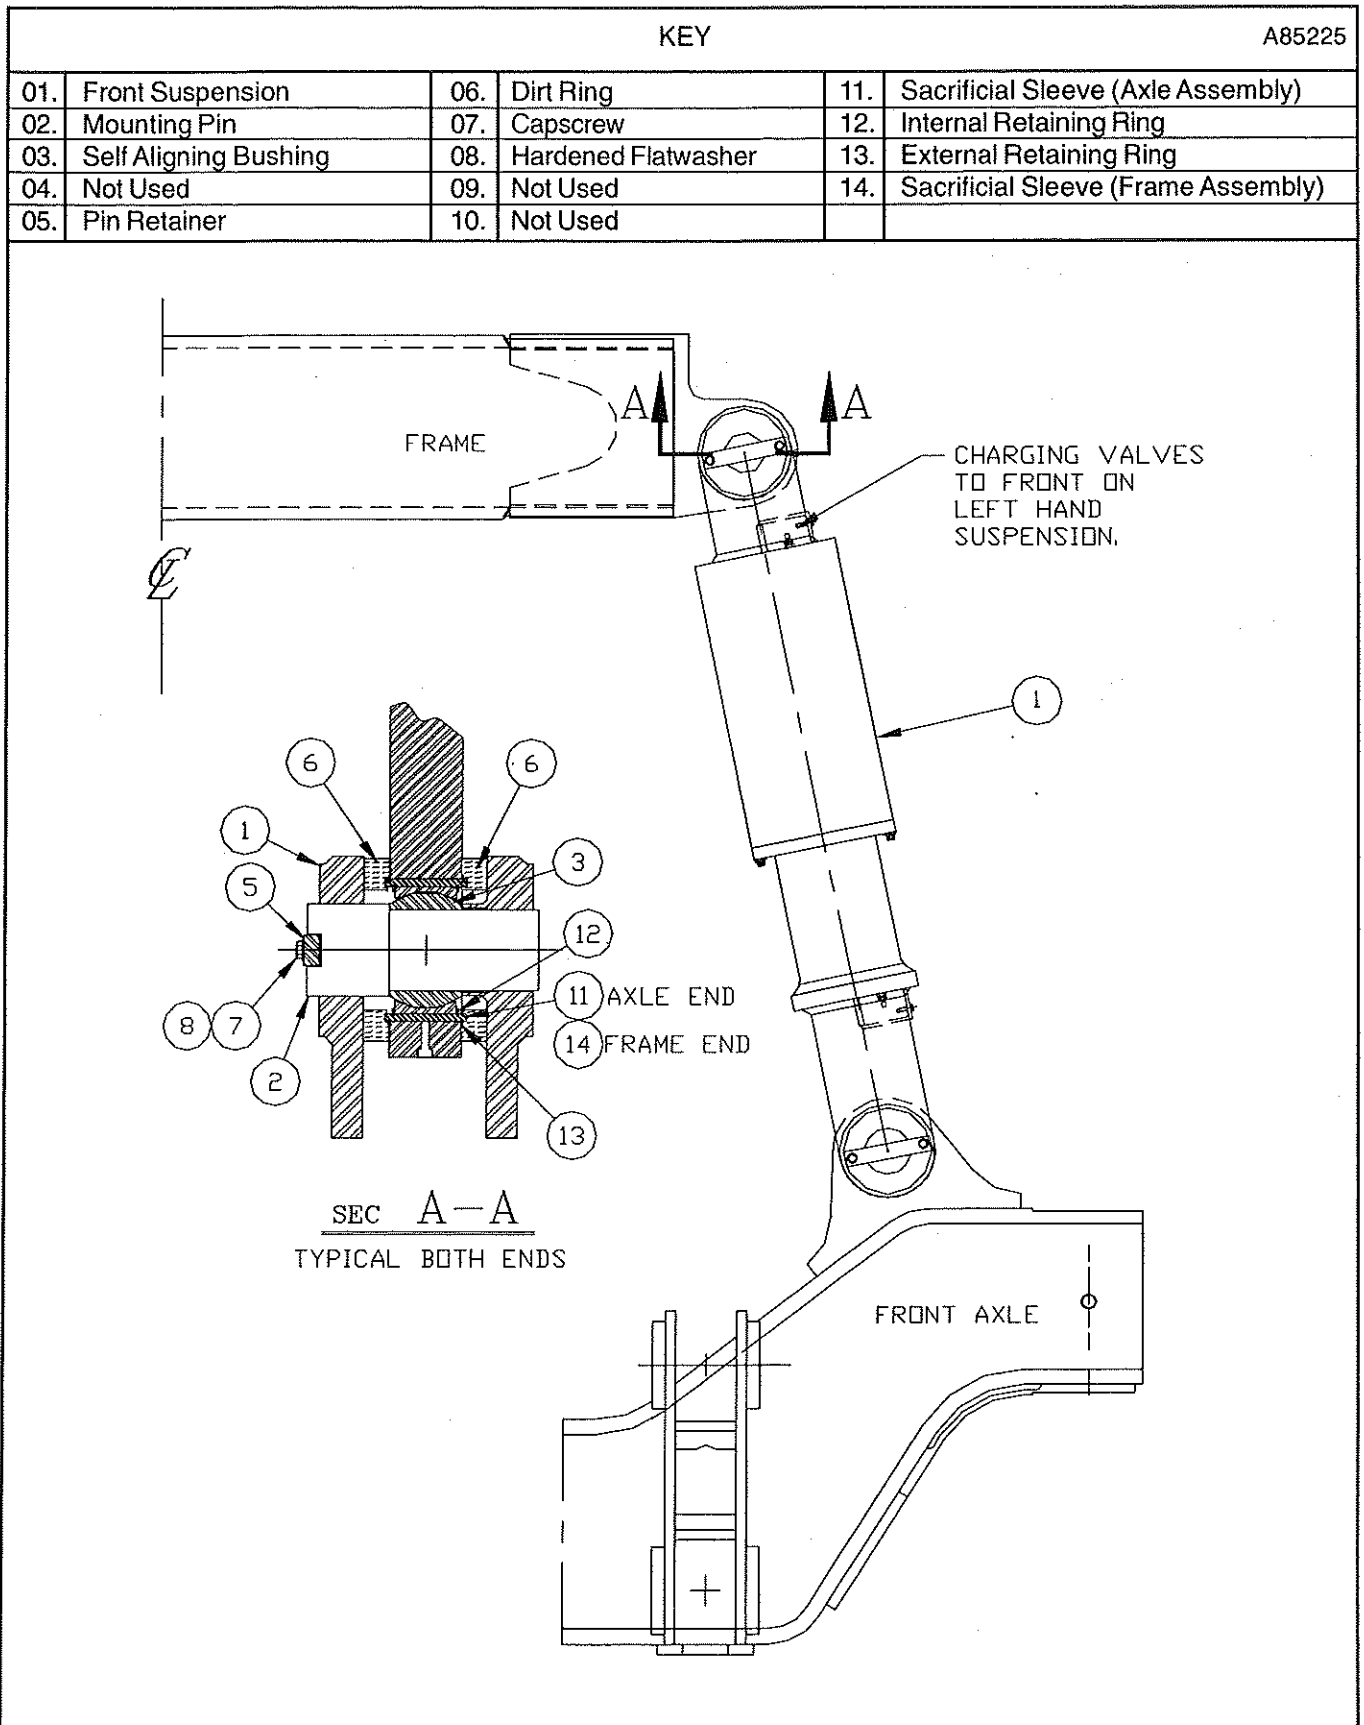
FRONT SUSPENSION MOUNTING ASSEMBLY (A85225)
